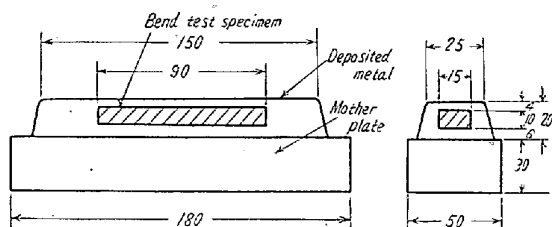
Multiple layer welding crack-sensitivity test (unit mm)
